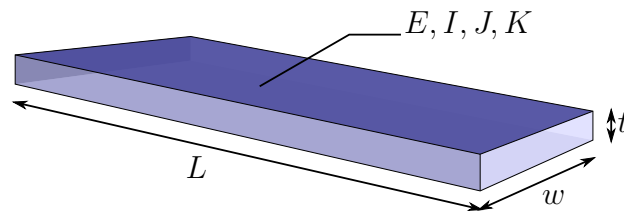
A flexure strip with dimensions, material and geometrical properties.
